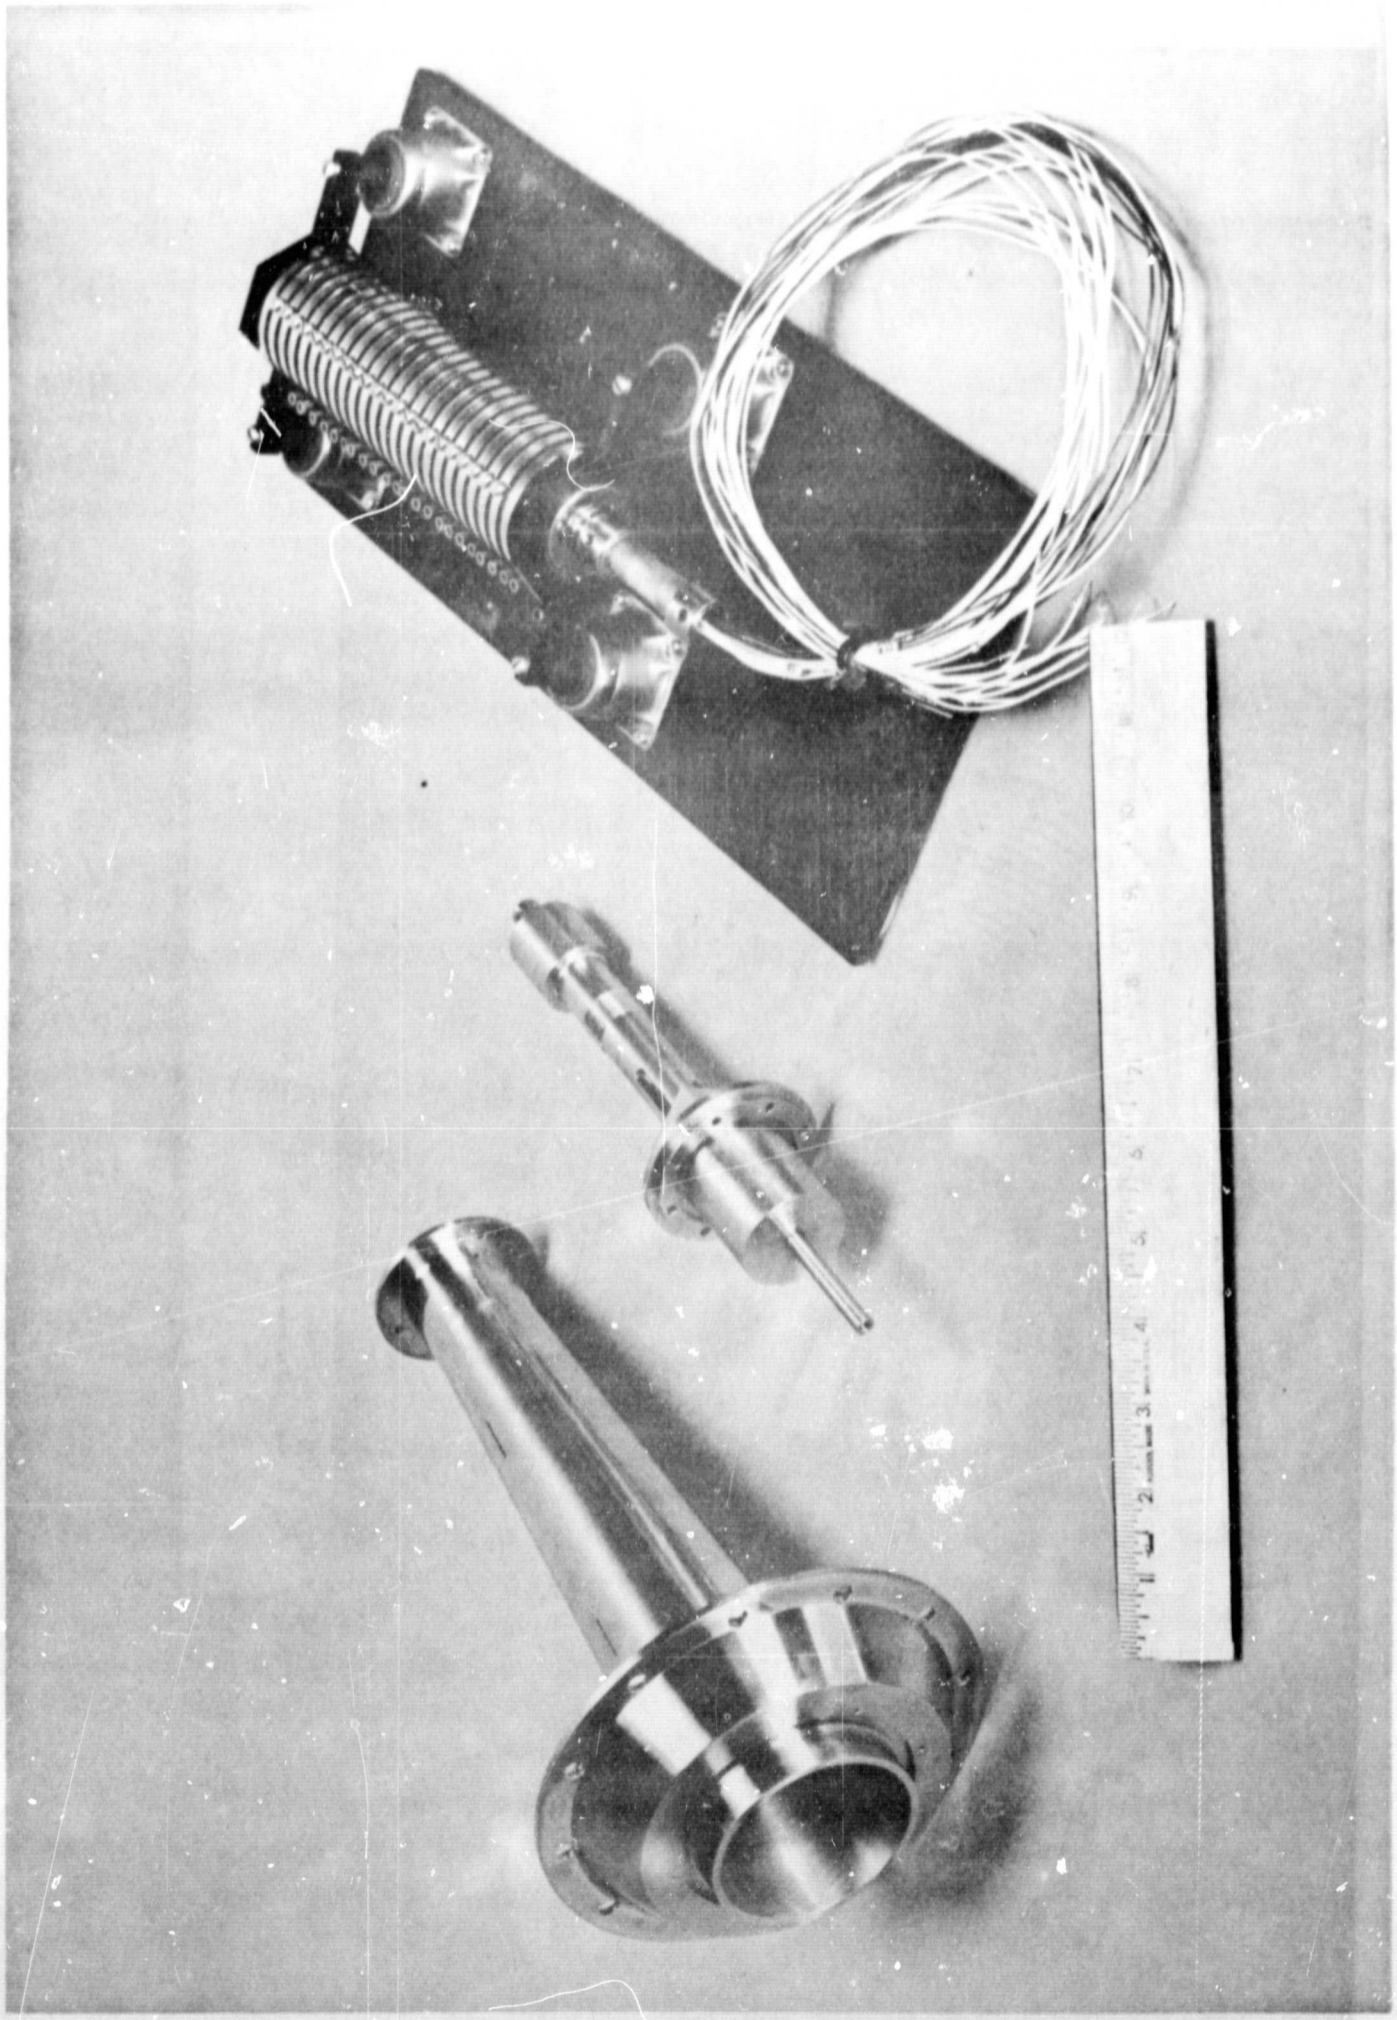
PHOTOGRAPH OF MACHINED CONDENSER SECTION WITH END PLUG AND SLIP-RING UNIT
